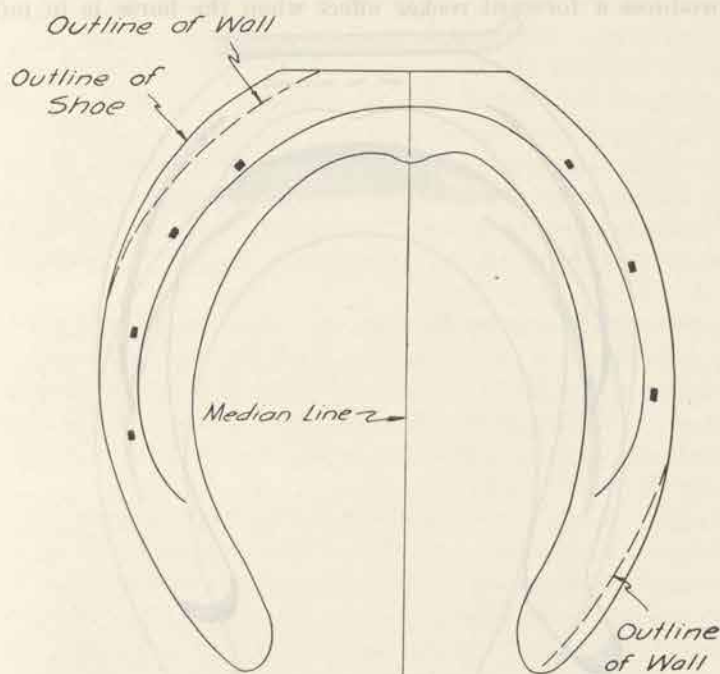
Lateral-extension-toe shoe (left front shoe hand-forged).
